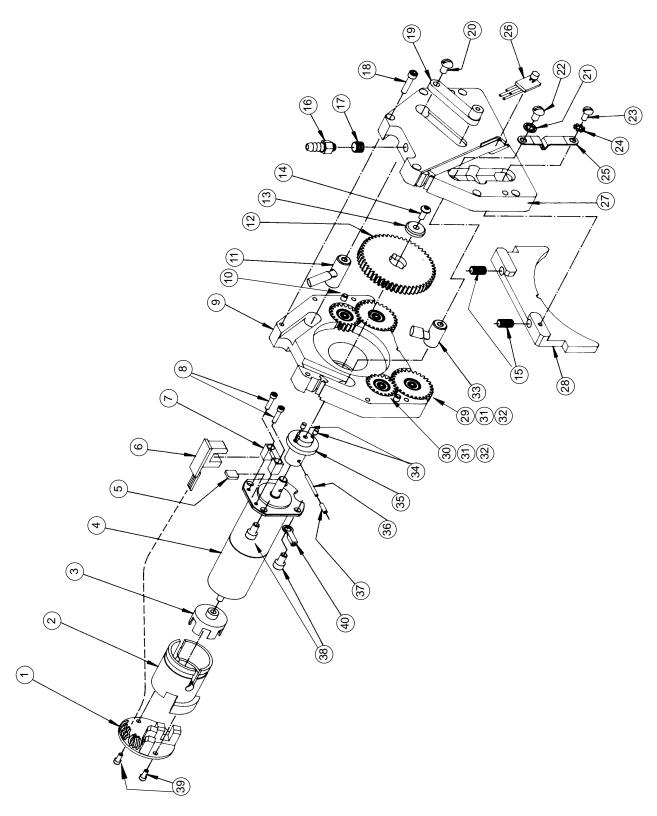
CWS-10H-A Motor and Power Block Assembly
